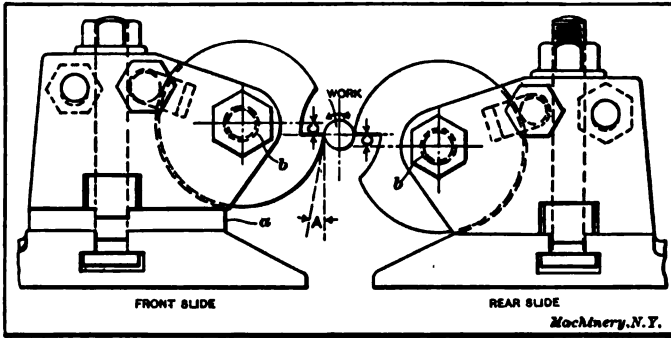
Circular Form Tools and Holders showing Location of Center of Tool in Relation to Center of Piece being formed
